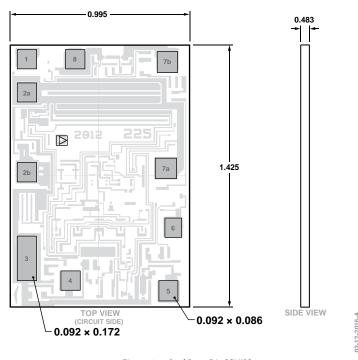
8-Pad Bare Die [CHIP] (C-8-7) Dimensions shown in millimeters
